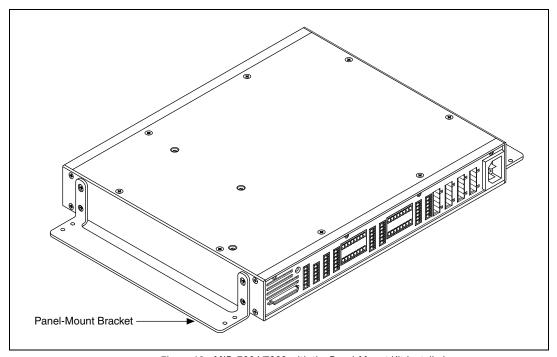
MID-7604/7602 with the Panel-Mount Kit Installed
